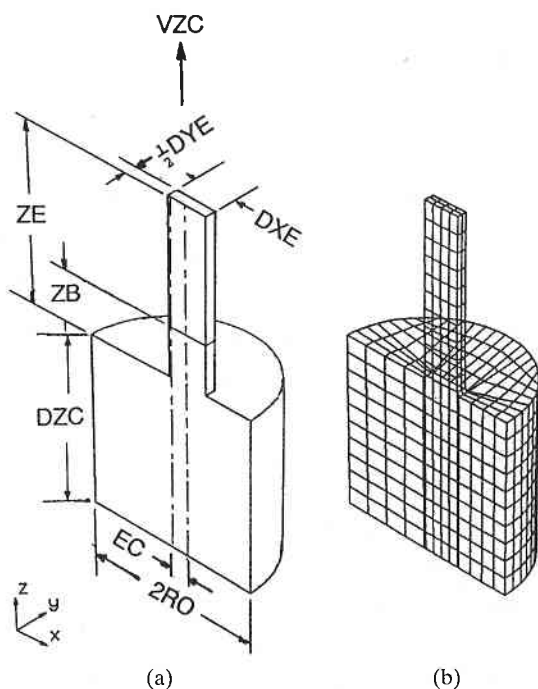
(a) Dimensions of product and tools. (b) Mesh system.
